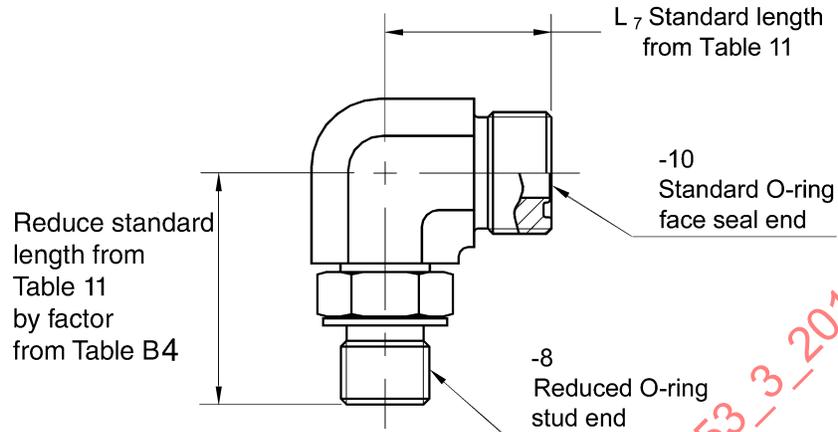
SHAPED FACE SEAL CONNECTOR WITH REDUCED O-RING STUD END
